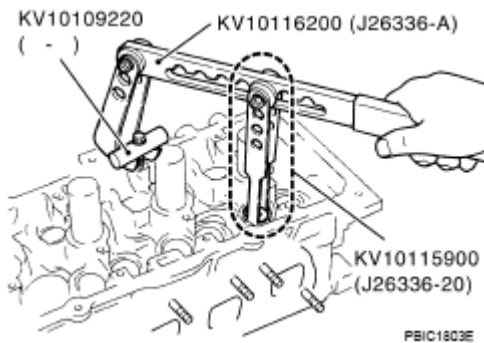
Compressing Valve Spring With Valve Spring Compressor
